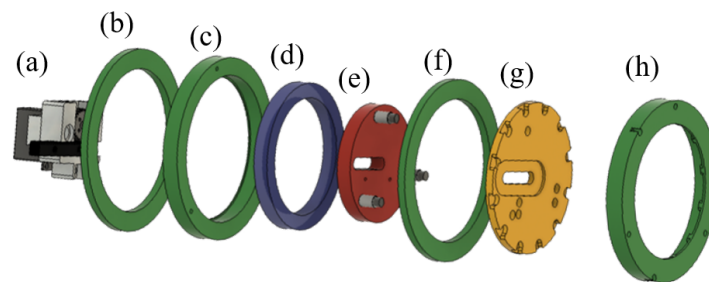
Assembly details on wheel module ((a) rack-and-pinion unit, (b) outer ring (side of rack-and-pinion unit), (c) outer ring (around bearing), (d) bearing, (e) inner ring, (f) outer ring, (g) clutch disk, and (h) clutch).
